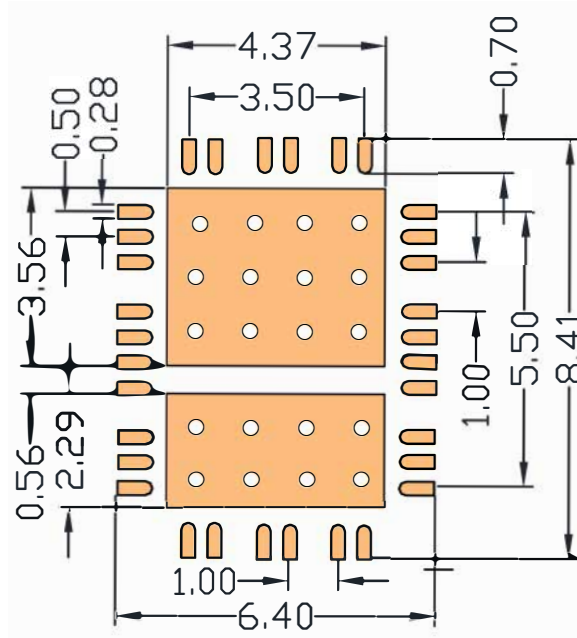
Top-Layer Solder Mask, Solder Paste, and Vias (mm)
